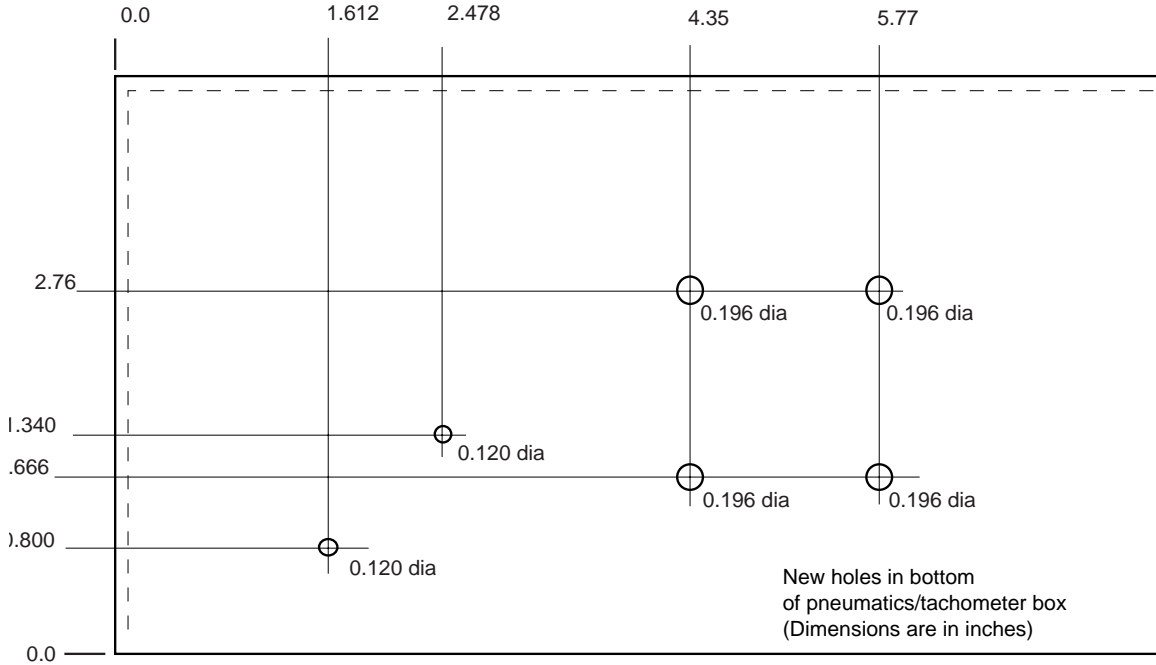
New Holes in Bottom of Pneumatics/Tachometer Box
